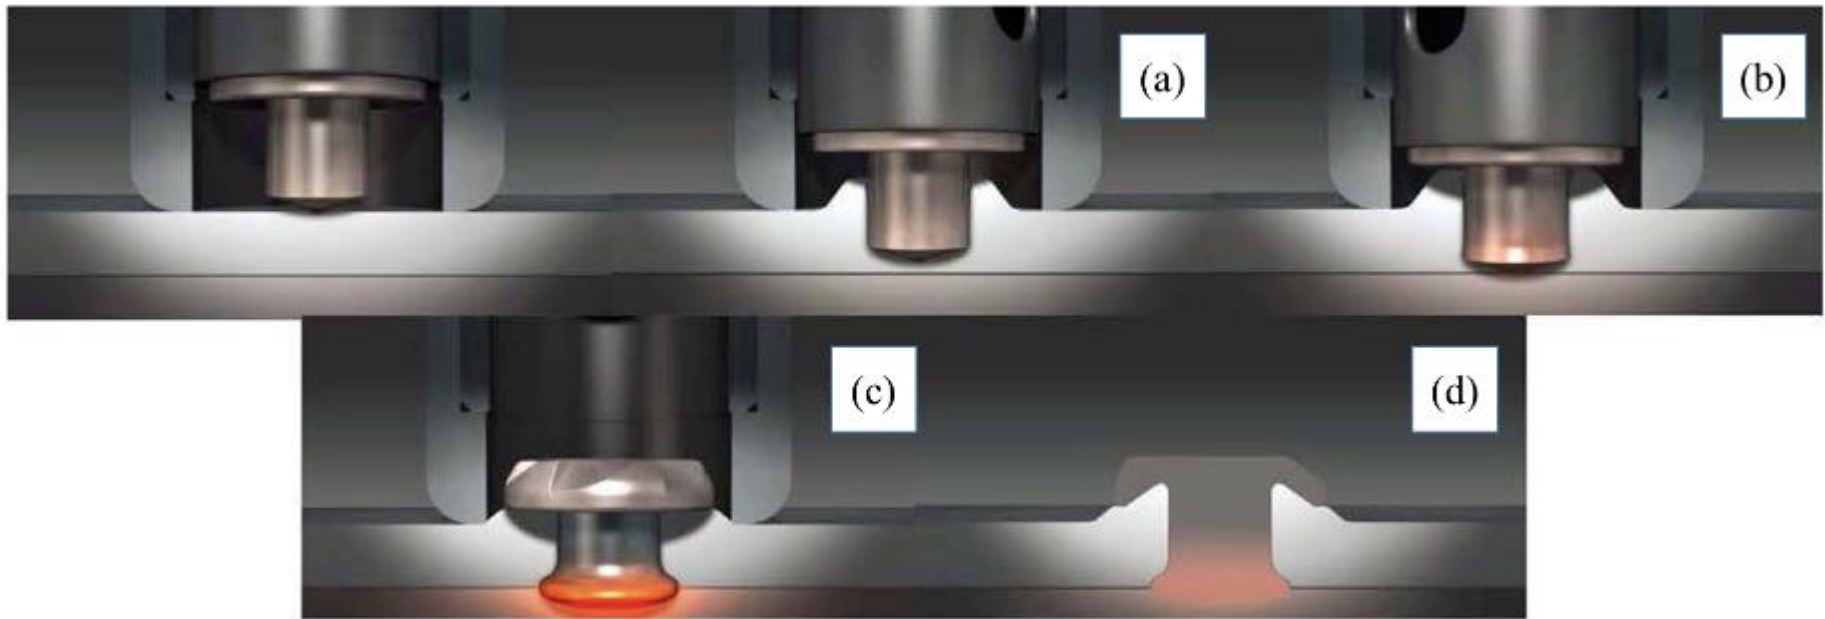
The EJOWELD process: rivet drilling the top sheet (a), rivet revolution (b), rivet fusion with the bottom sheet (c) and final joint (d).
